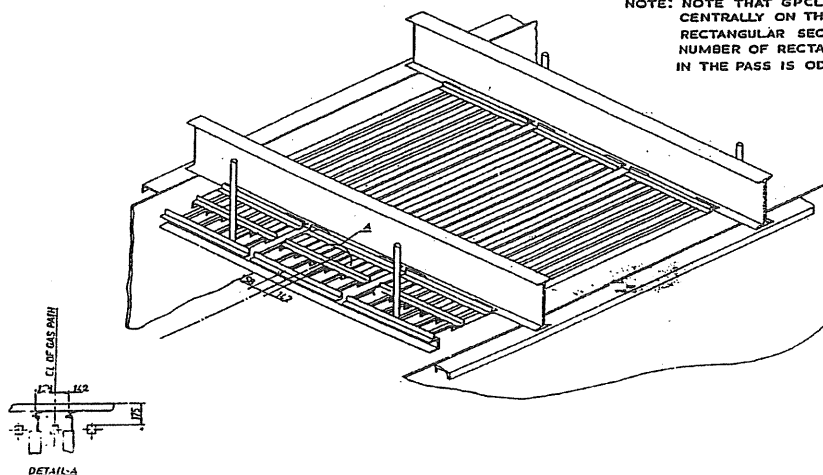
ASSEMBLY OF FRAME PART TOP WITH COLLECTING ELECTRODE SUSPENSION SHOWING GAS PATH CENTRE LINE.
